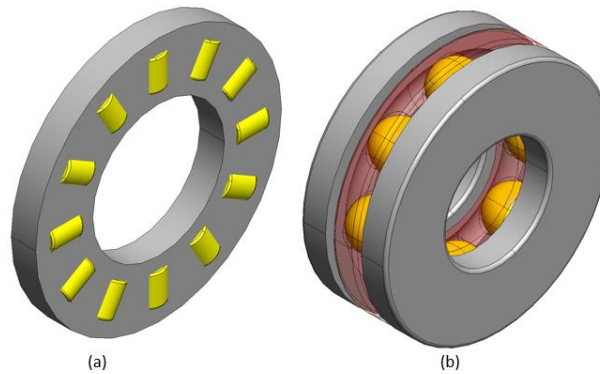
Selected bearings: (a) Roller bearings and (b) ball bearing (SKF Bearings n.d.)
